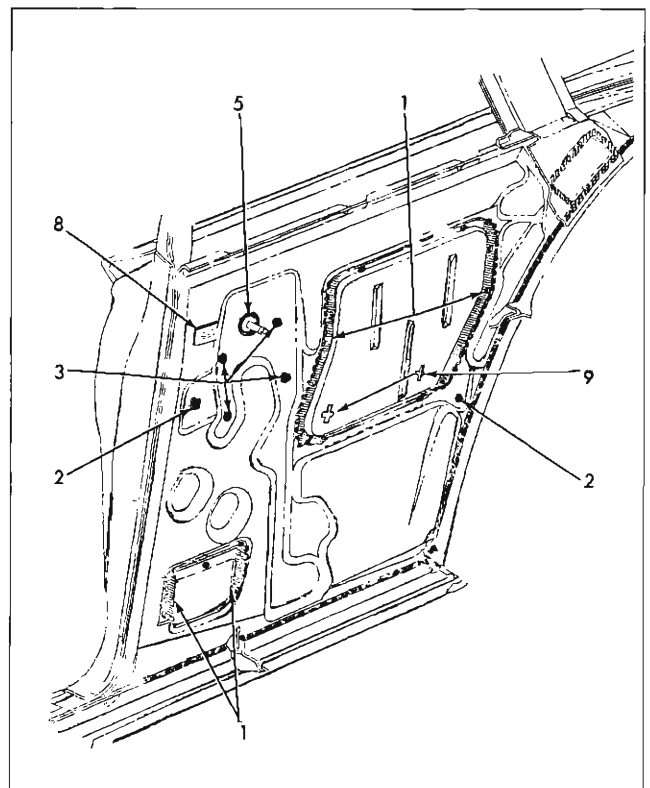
Inner Panel Sealing - 11 Style Manual
